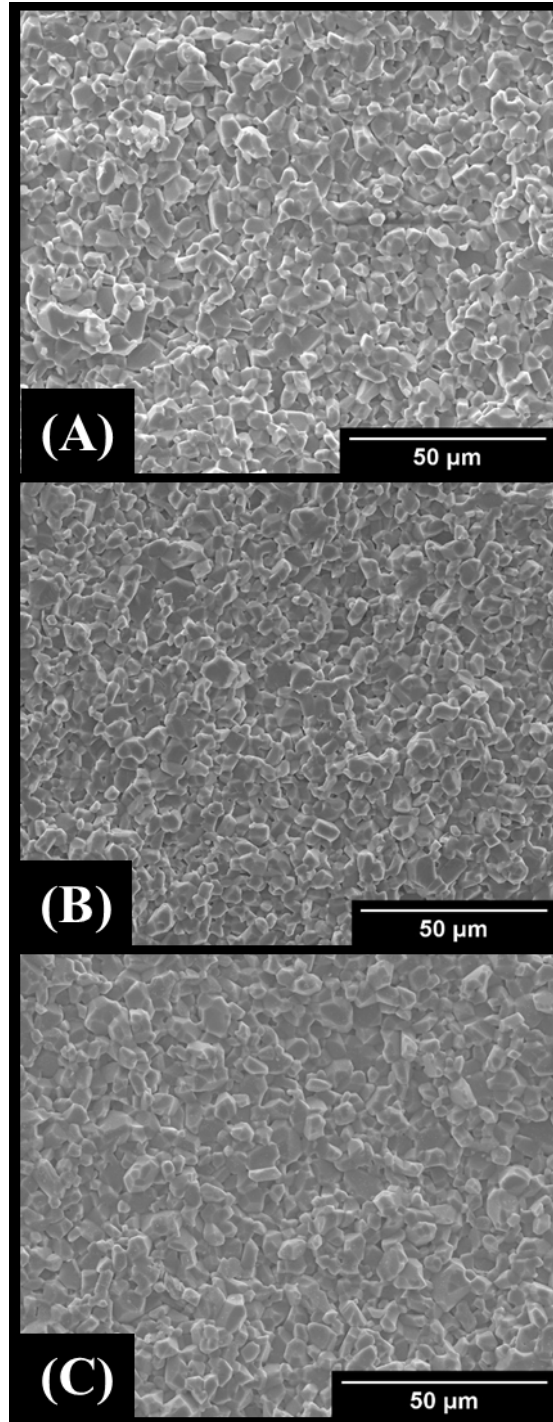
Fracture surface of a printed part that was manually broken and experienced no ΔT . (B) fracture surface that broke during testing and had a ΔT of 700° C. (C) fracture surface that broke during testing and had a ΔT of 900° C.
